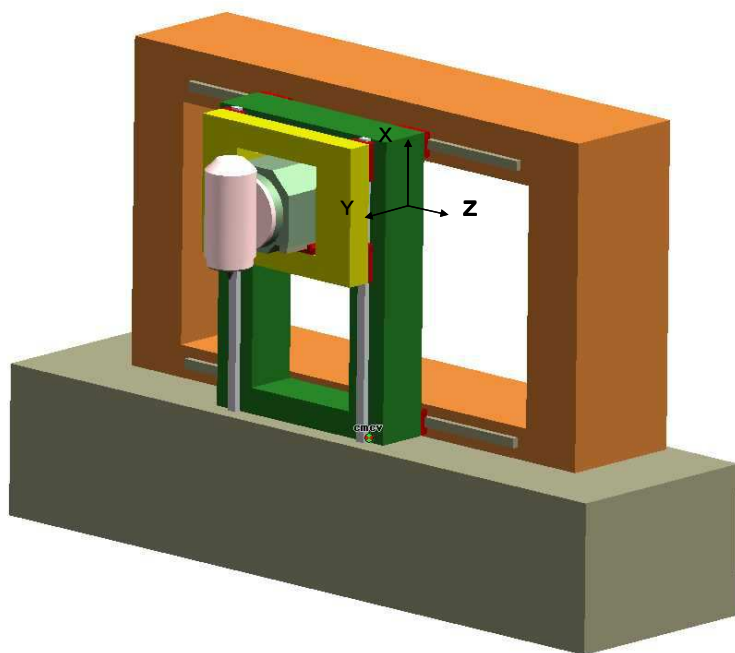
Sample structure of 5-axis compound multiaxis machine tool
